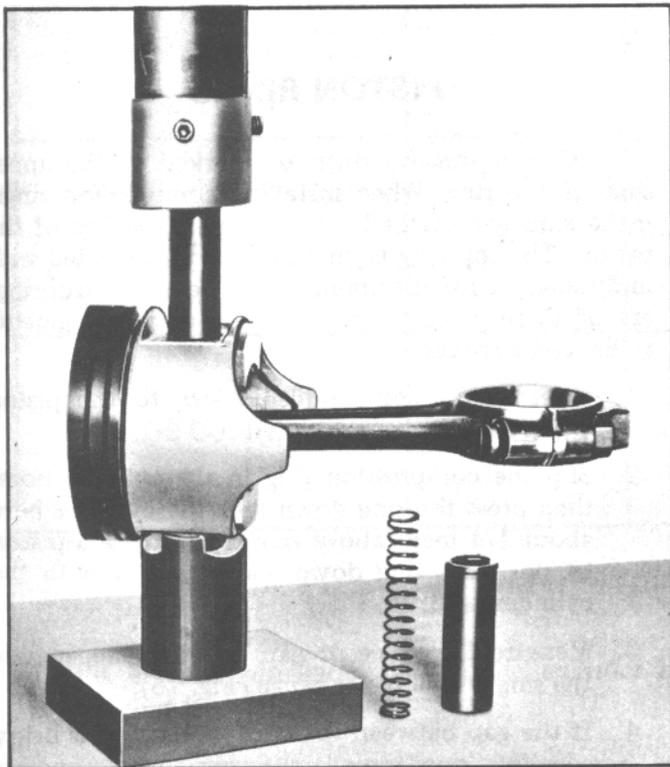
Removing Piston Pin (In-Line & "Small V8")
